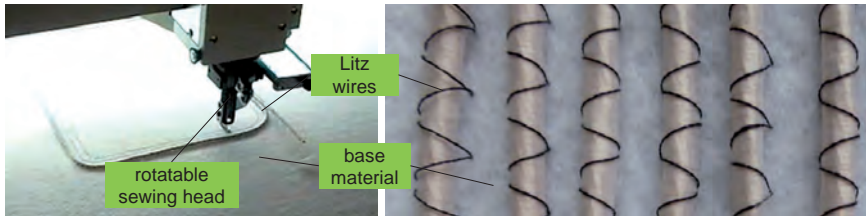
Fixation of wire windings with industrial sewing machines [17].
